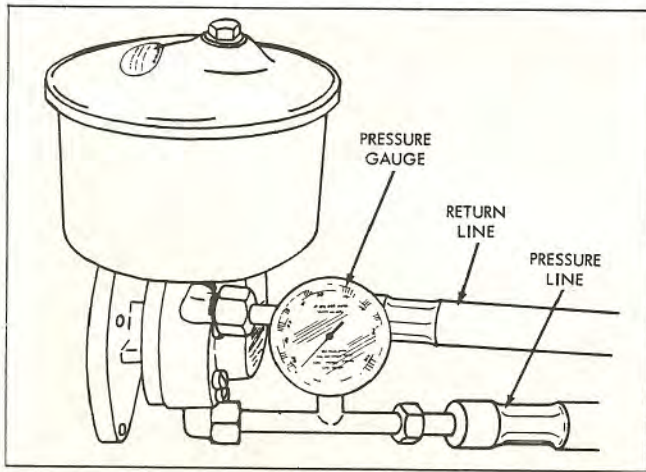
Diagram Illustration of Installed Pressure Gauge
